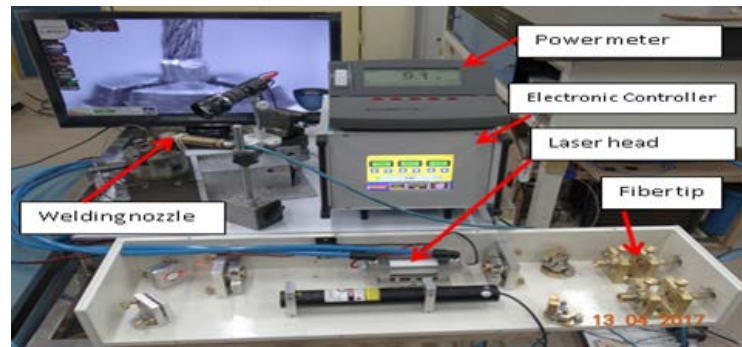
shows a view of in-house developed laser welding system for brachytherapy assemblies.
